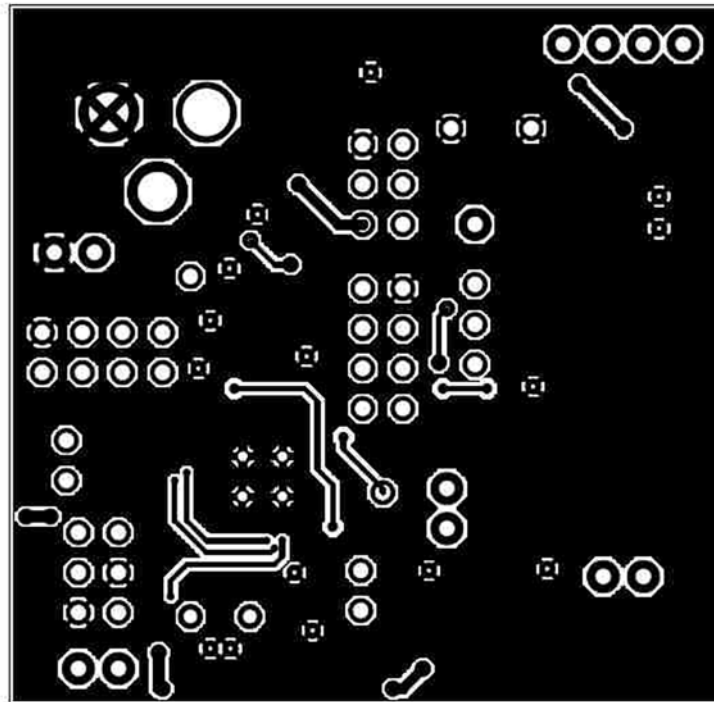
ATA6602/ATA6603 Development Board; Bottom Side, Top View
